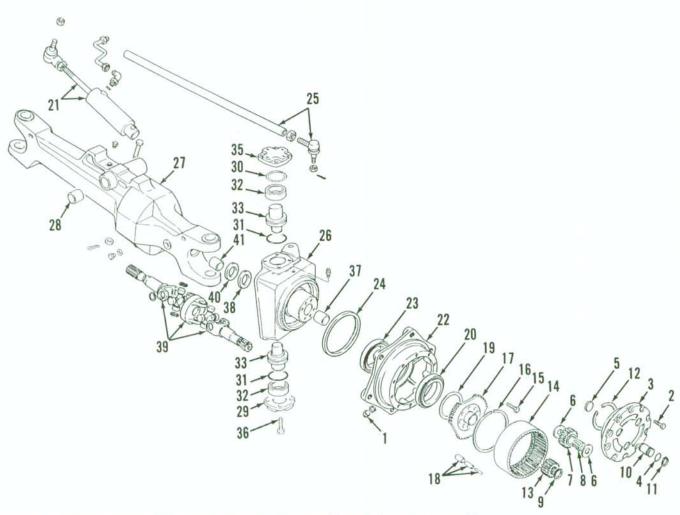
Exploded view of front-wheel-drive steering knuckle and planetary assembly.
